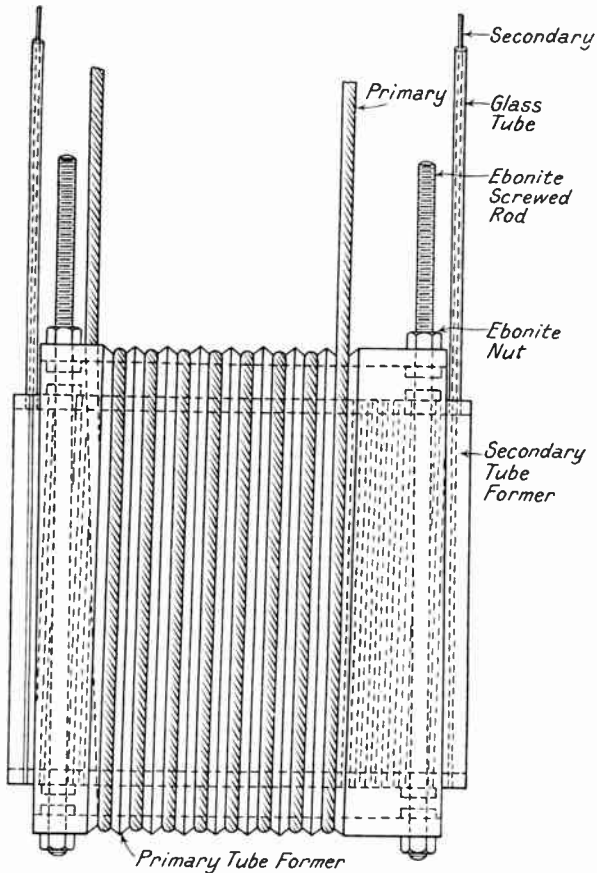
METHOD OF SUPPORTING THE PRIMARY AND SECONDARY TUBE FORMERS AND WINDINGS OF A HIGH FREQUENCY TRANSFORMER.
